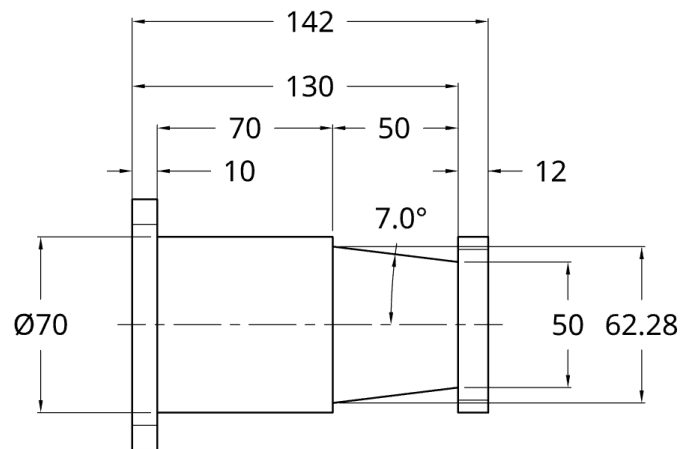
Example Illustration of Drawing with Redundant Dimensions
